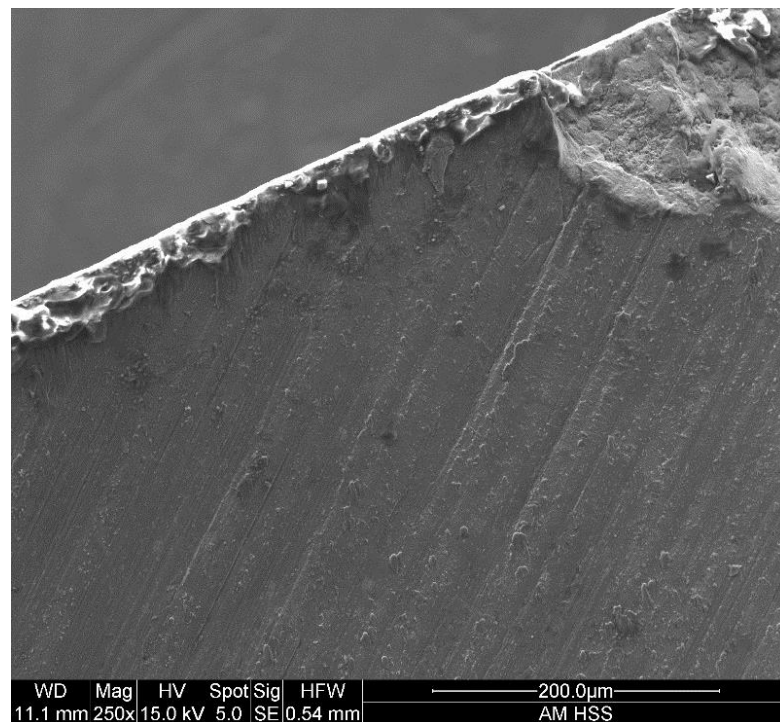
250x SEM flute view of cutting edge HSS drill bit after drilling 60 holes in AM titanium.
